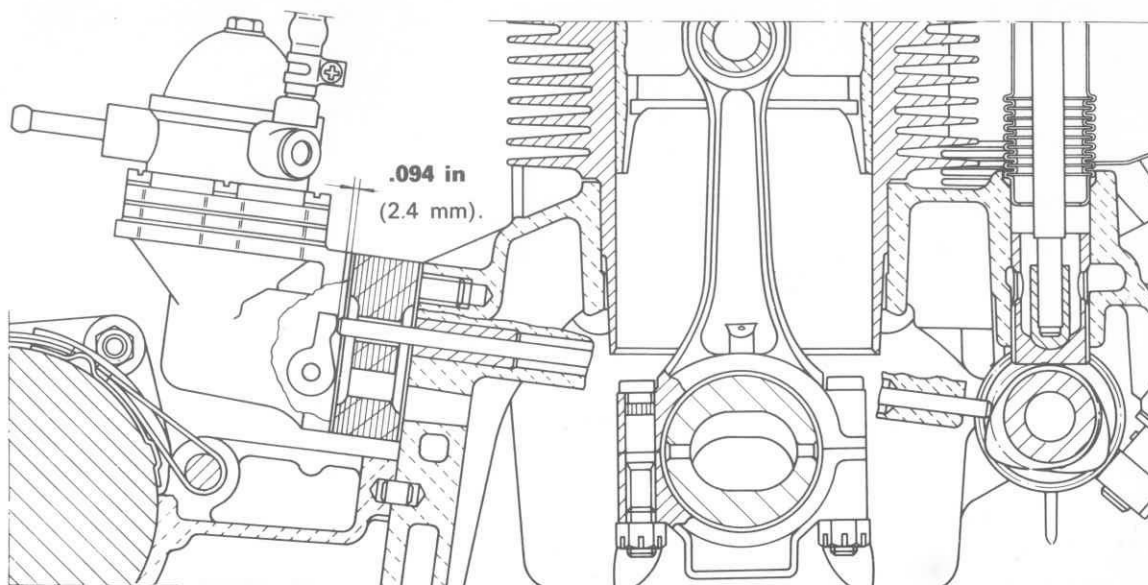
3 Part section of crankcase showing fuel pump pushrod. As shown, the pushrod stroke should be .094 inch (2.4 mm)
